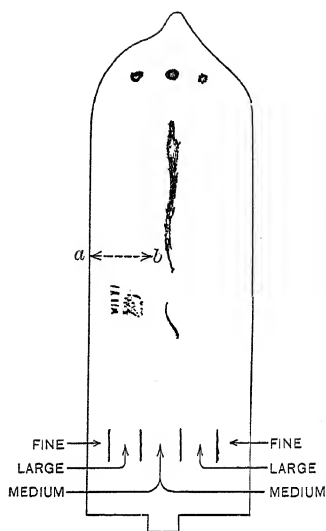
SKETCH OF INGOT FROM WHICH THE PRINT SHOWN IN FIG. 5 WAS TAKEN.
